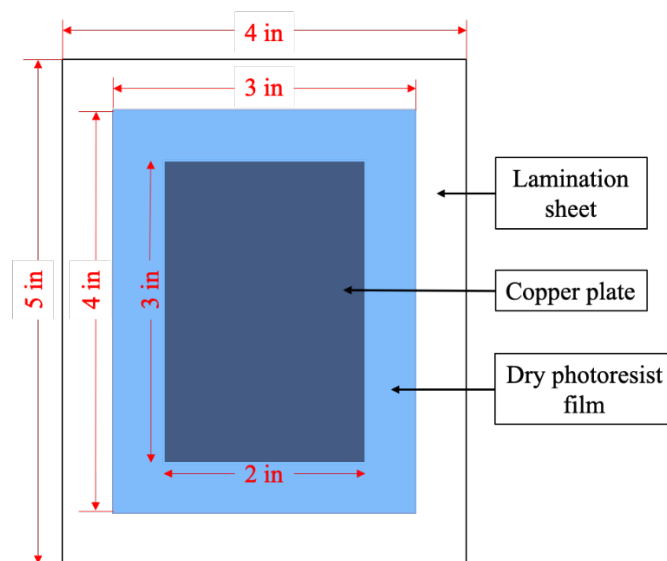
Dimensions of lamination sheet, copper plate and dry photoresist film and the arrangement of the three materials to form a mold sandwich.
